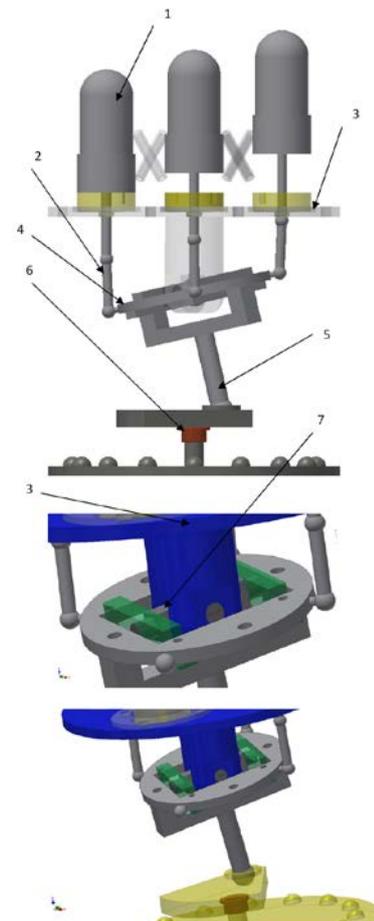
Model of wobble yoke: (general view- up, details of wobble board mechanism- down): 1- piston, 2- ball joint segment, 3- handle cylinders (fixed part), 4-wobble board, 5- shaft with ball joint, 6-bearing flywheel (fixed part), 7-cross joint
